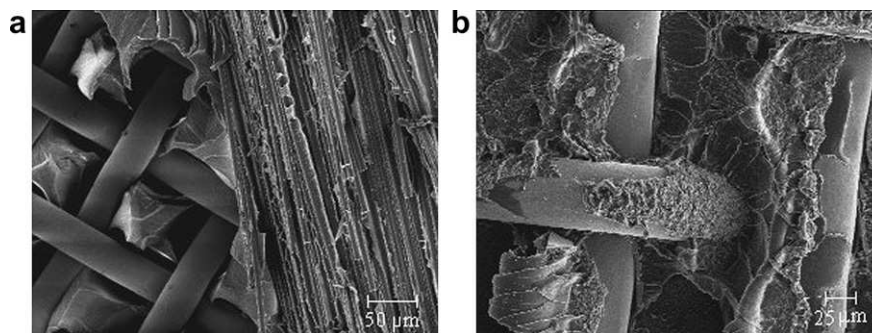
Fracture surfaces of quasi-isotropic specimens welded using the conventional (a) [15] and TiO_2 (b) HE, under three-point bending.
